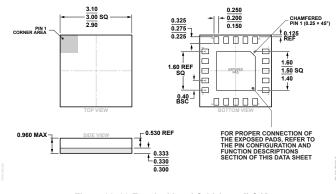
20-Terminal Land Grid Array [LGA] (CC-20-6) Dimensions shown in millimeters
